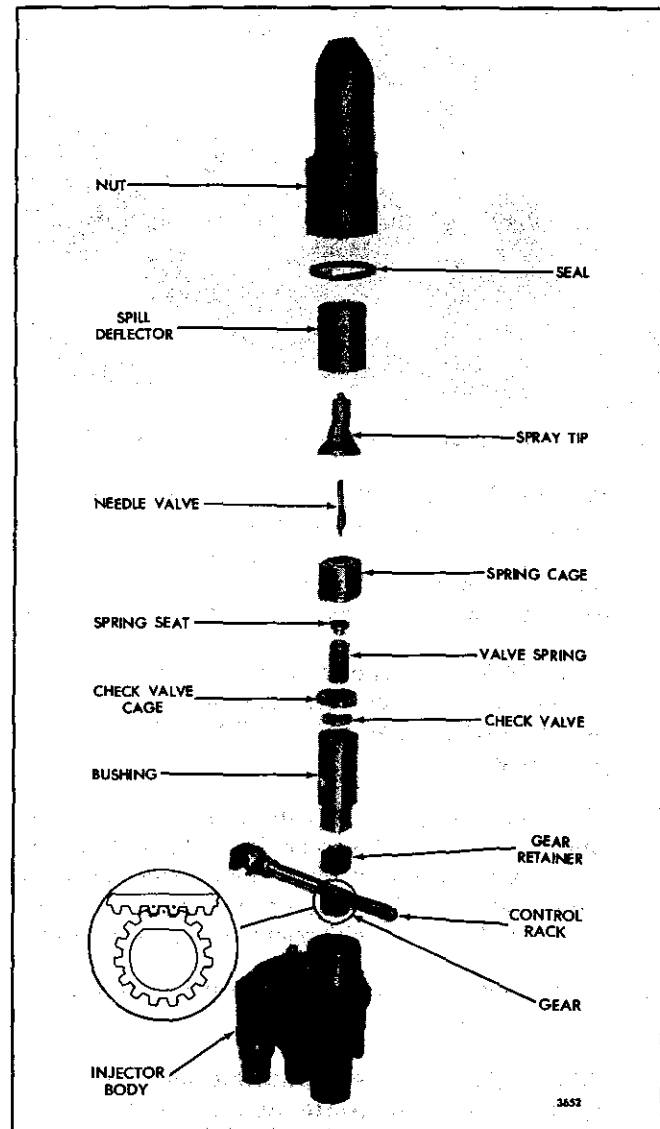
Injector Rack, Gear, Spray Tip and Valve Assembly Details and Relative Location of Parts
